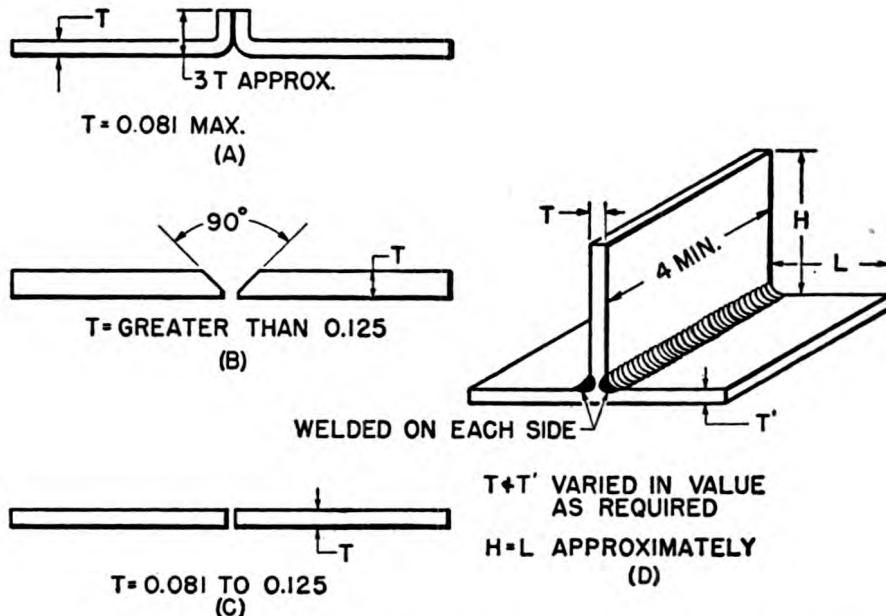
Welding samples of flanged, butt, and fillet joints on aluminum sheet.
